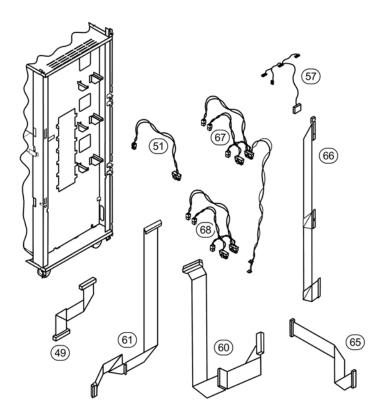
Exploded view for 3800ux/7100ux models (5 of 6)
